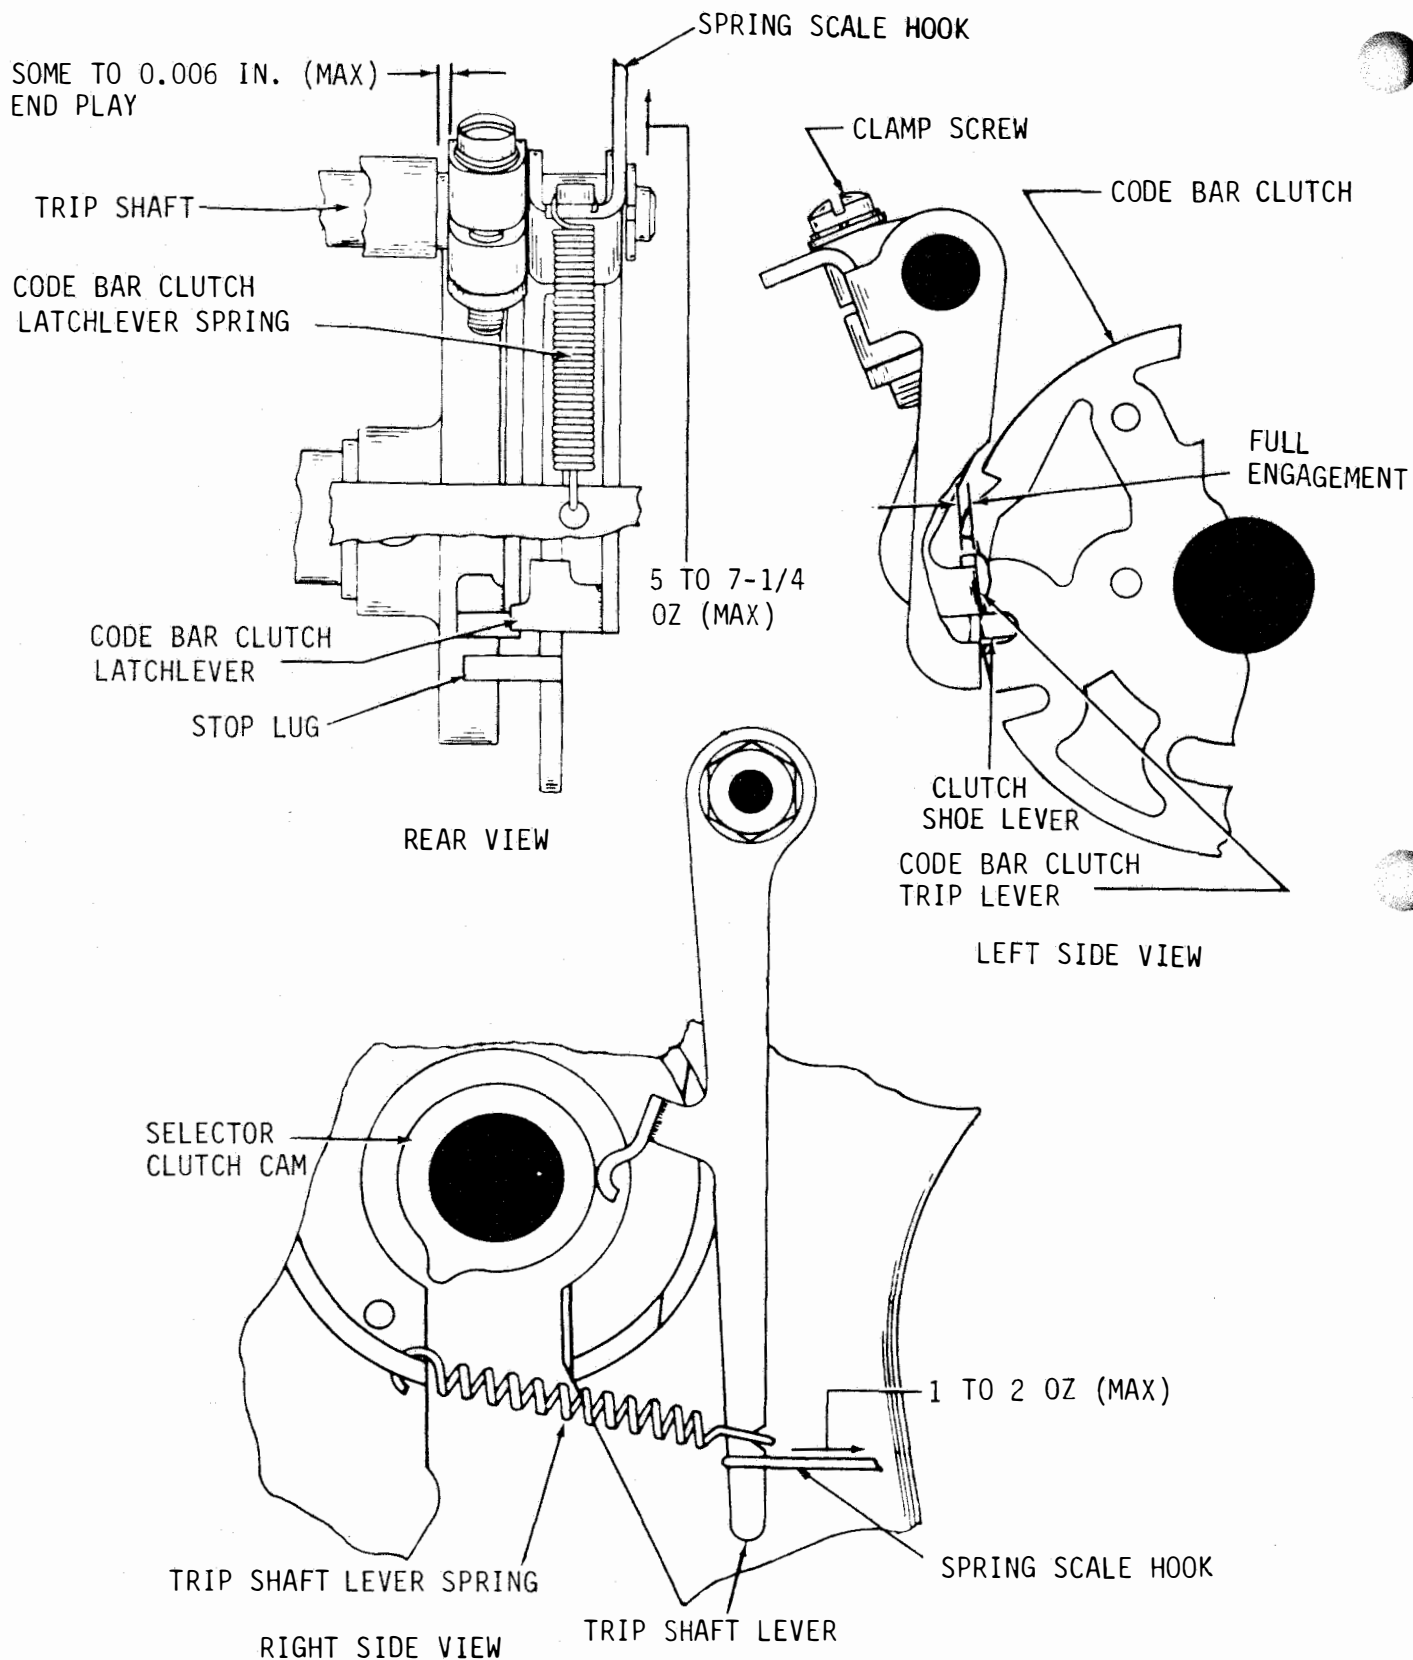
Clutch Latchlever Spring (Except Selector), Code Bar Clutch Trip Lever, and Trip Shaft Lever Spring
